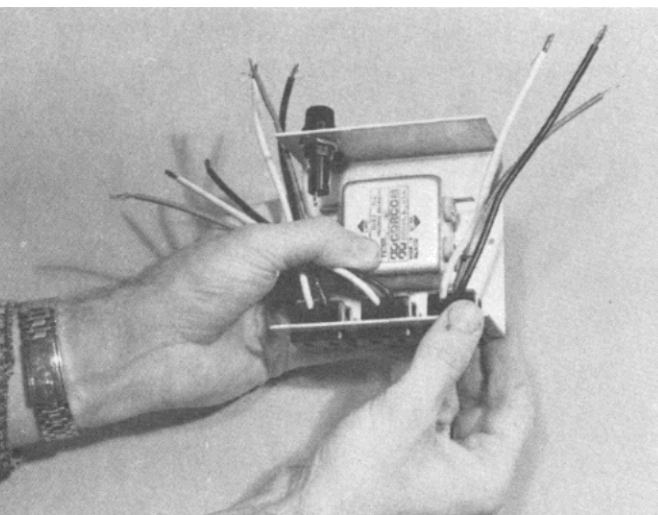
Position the RFI filter to provide adequate clearance between components. Mark location, drill holes, and mount filter. Due to their low profile, use of pop rivets is recommended to minimize the possibility of scratching the surface the filter is sitting on.
